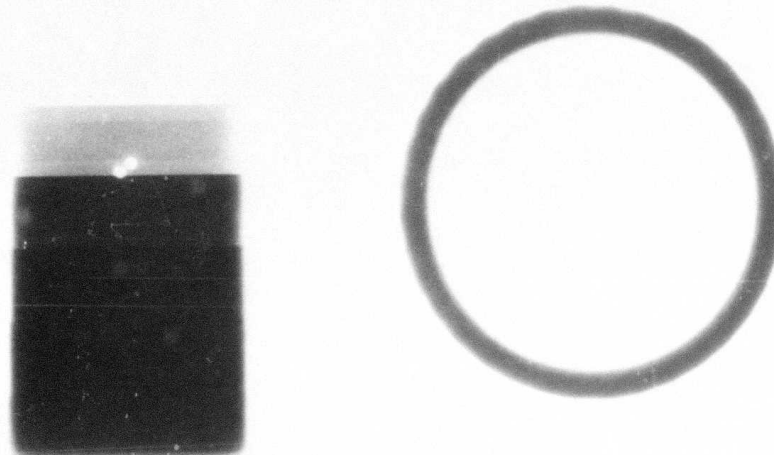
X-Ray Radiographic Reversal Print of Injection Molded Blade Ring and Platform
